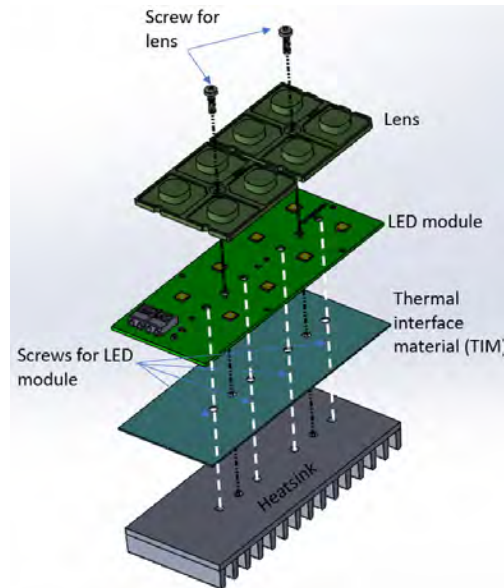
A typical LED module assembly with heatsink, TIM, lens and screws.
